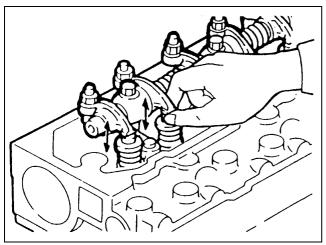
Finding top dead center on compression stroke for No. 1 piston — 2
